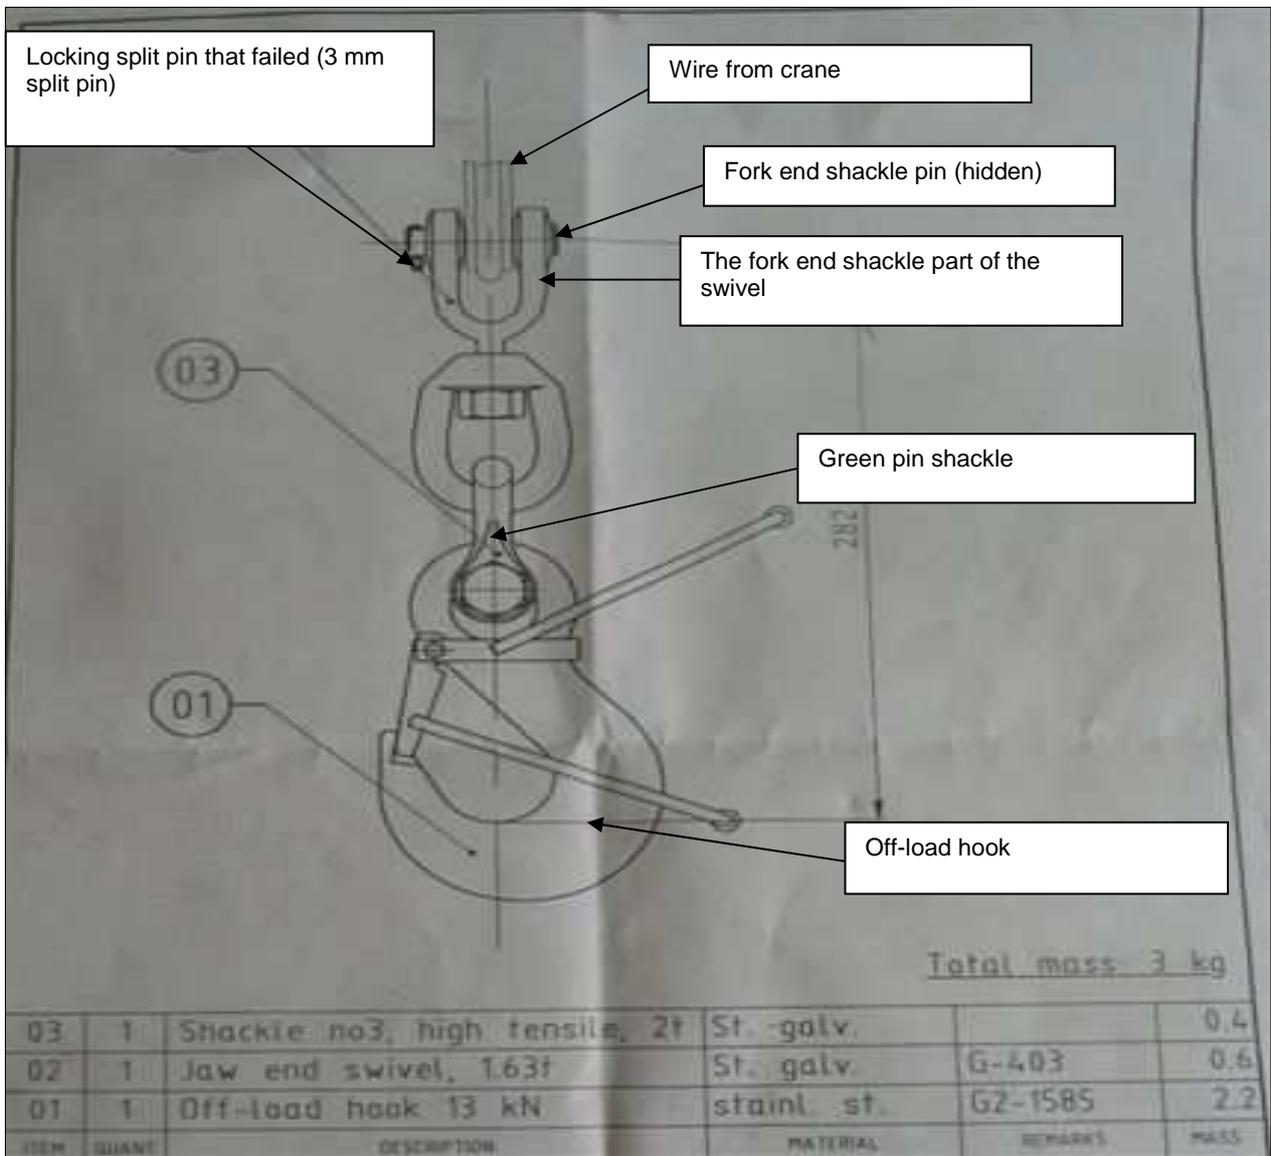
Picture of manufacturer's drawing of the hook arrangement
